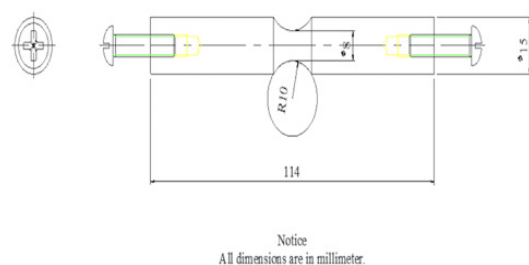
The load and support anvils of the INSTRON 4467 Tensile Testing machine are identical and contain a 'divot' in the center where we locate the specimen. The 'divot' is made for the specimen to fit precisely for the three-point bending test.
